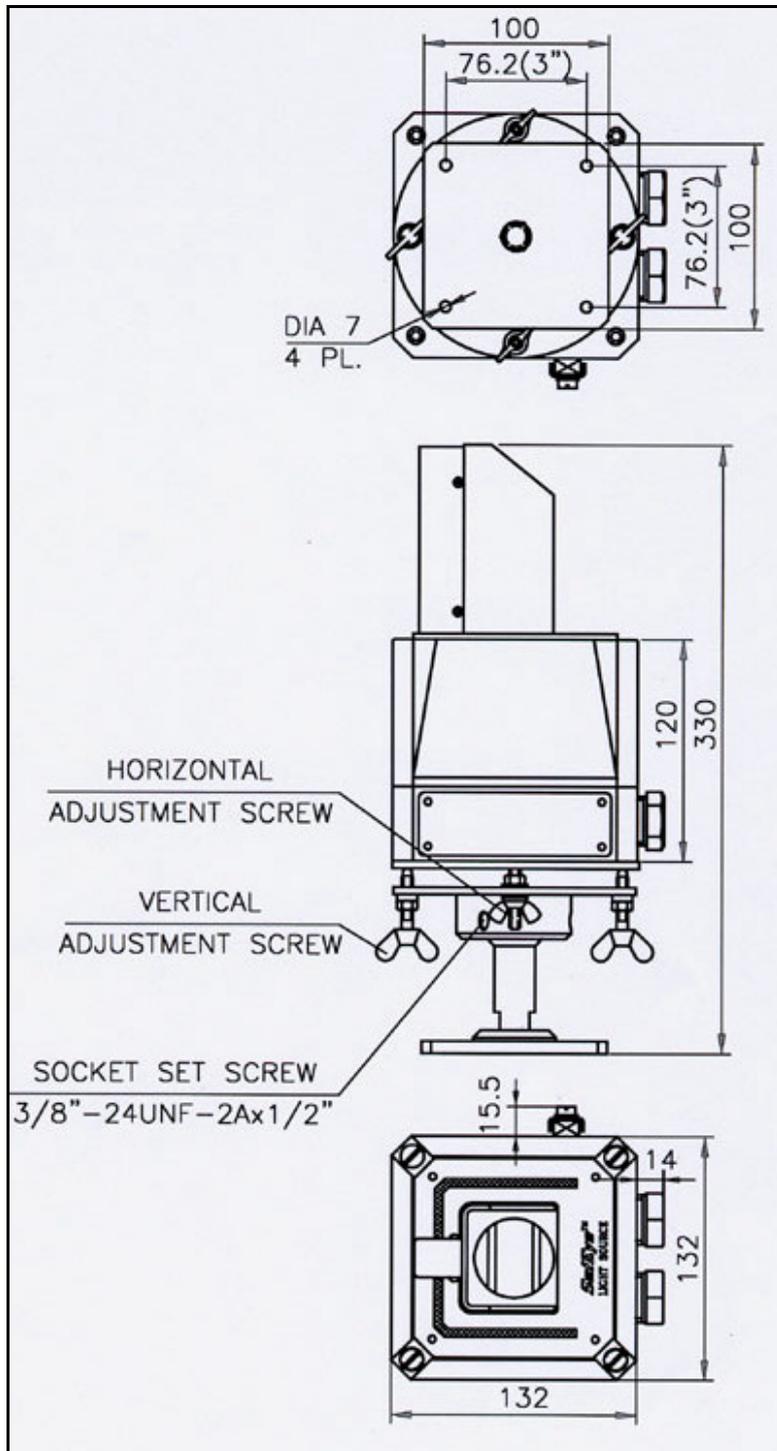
Source Outline Drawing (Reflector Type) With Swivel Mount
